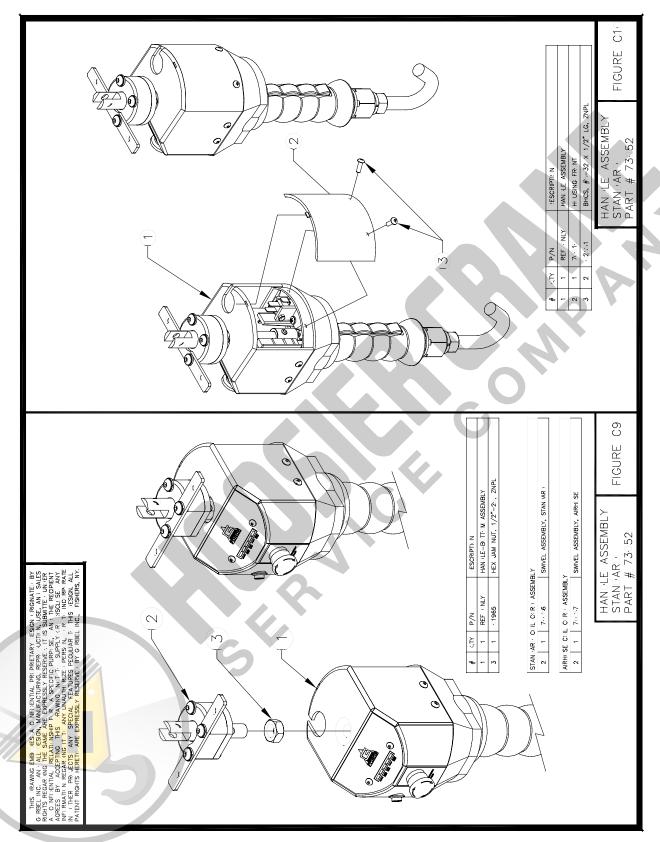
(bottom) & Figure C10 (top). Standard Handle Assembly.
